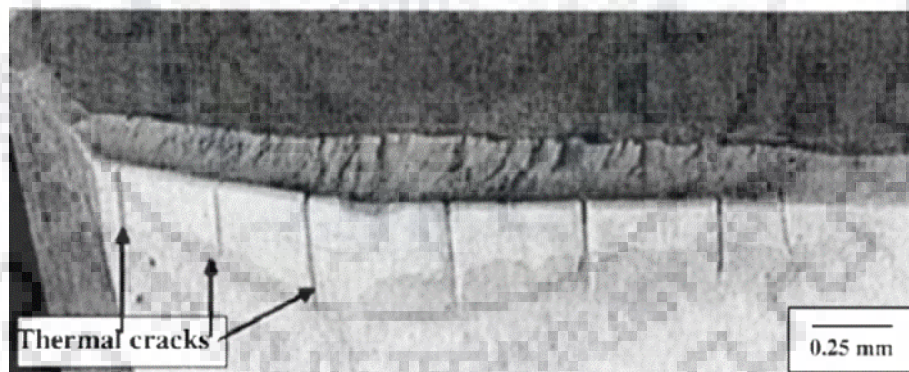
Thermal cracks on the flank and crater of tool after milling [Bellosi et al., 2003].
